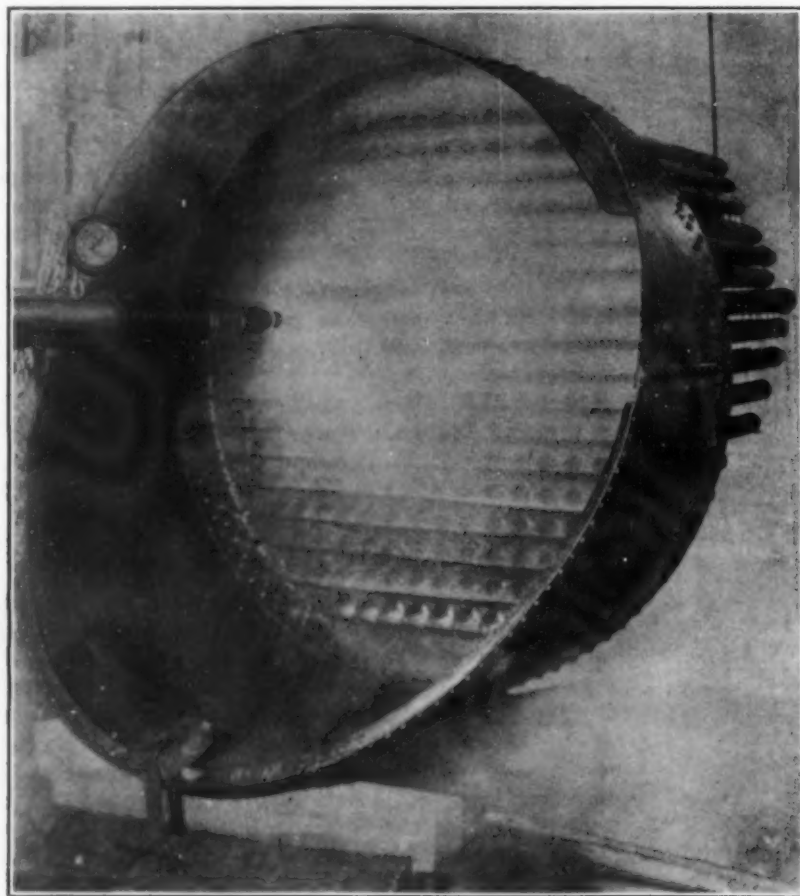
Photograph Showing Arrangement of Nozzle and Tube-Sheet From Front End
